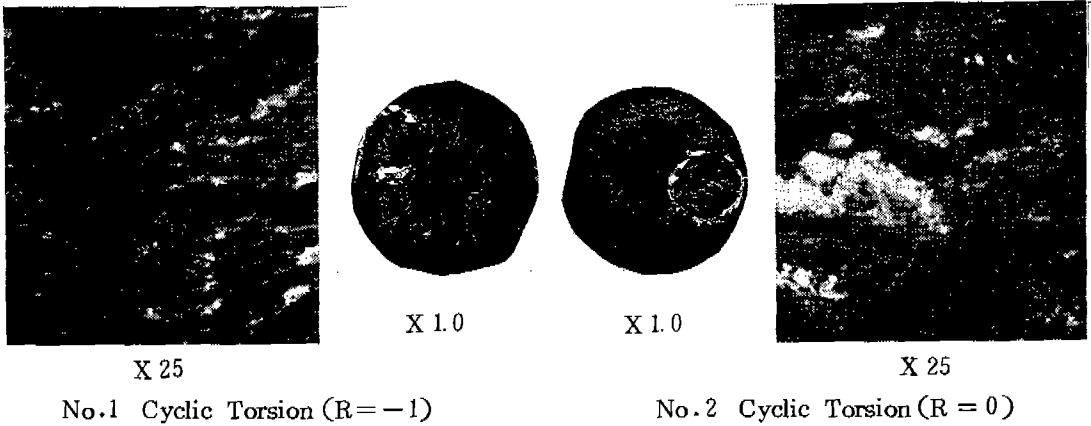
Fracture surfaces for specimen No. 1, No. 2
